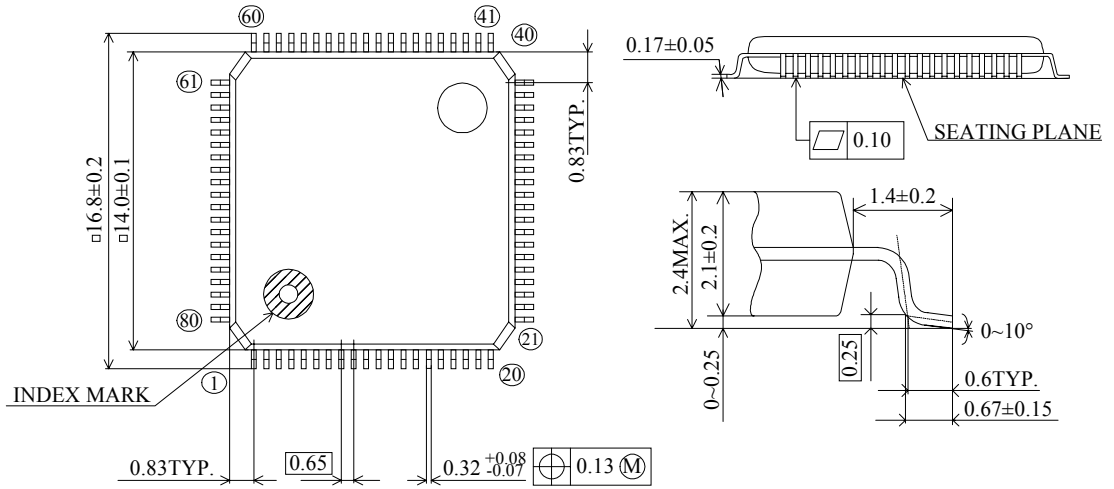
80-Pin QFP:GA Package Dimension Diagram
